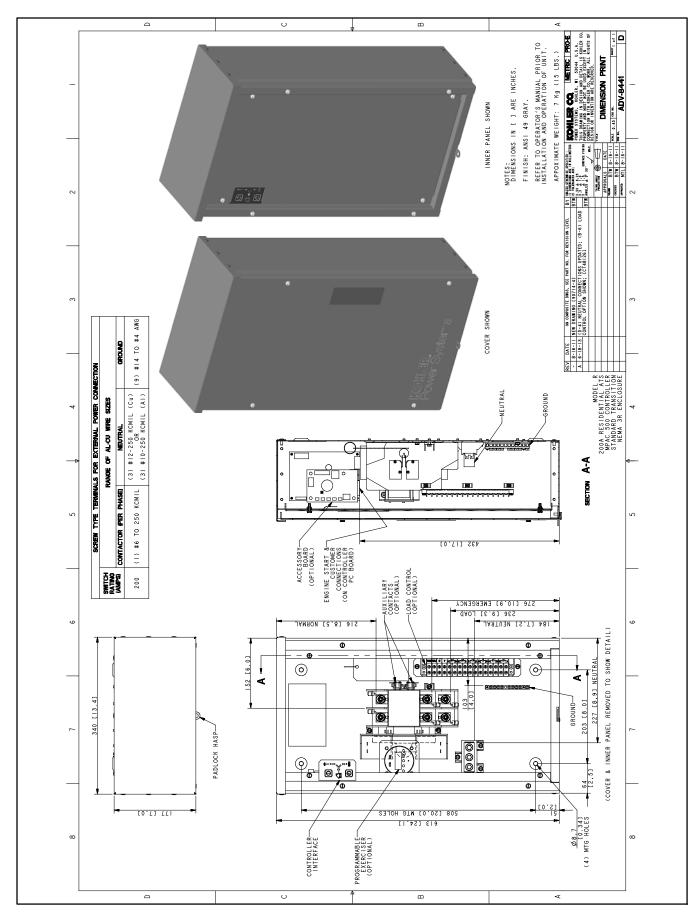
Dimension Drawing, 200 Amp NEMA Type 3R Enclosure without Load Center, ADV-8441
